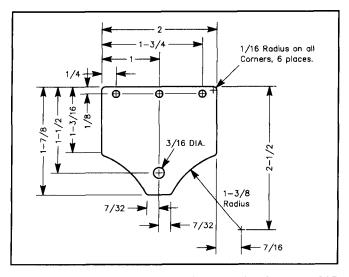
Plate loading capacitor C9 is made of 0.010-0.015 in. hard brass shim stock or beryllium copper. Have the capacitor silver plated to 0.0001-in. minimum thickness. Specify nickel-less plating.
